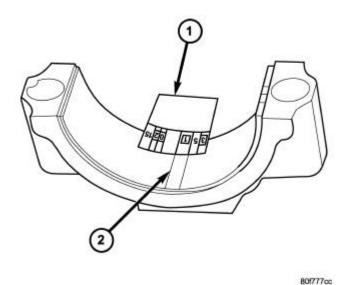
Measuring Bearing Clearance with Plastigage Courtesy of CHRYSLER LLC
